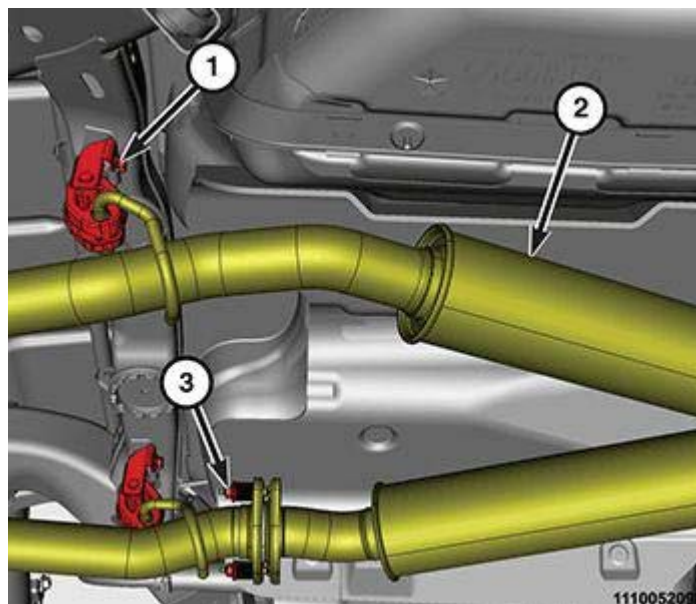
Front Isolator Mounting Bolt, Left Side Resonator And Tailpipe Assembly Flange Nuts
